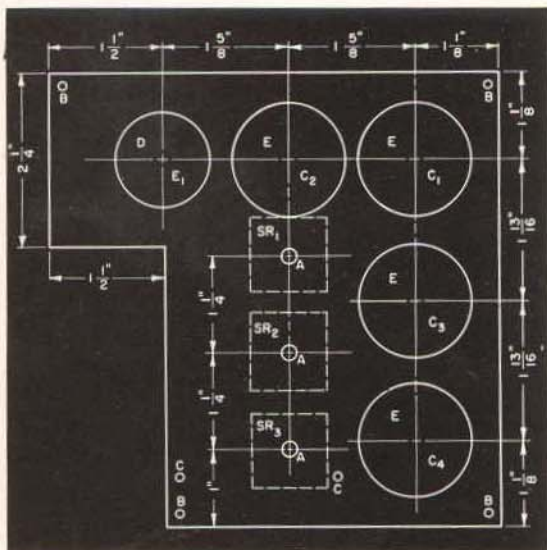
Drilling diagram of the chassis plate on which most components are mounted. Small holes should be drilled to suit the mounting holes of parts actually used.
